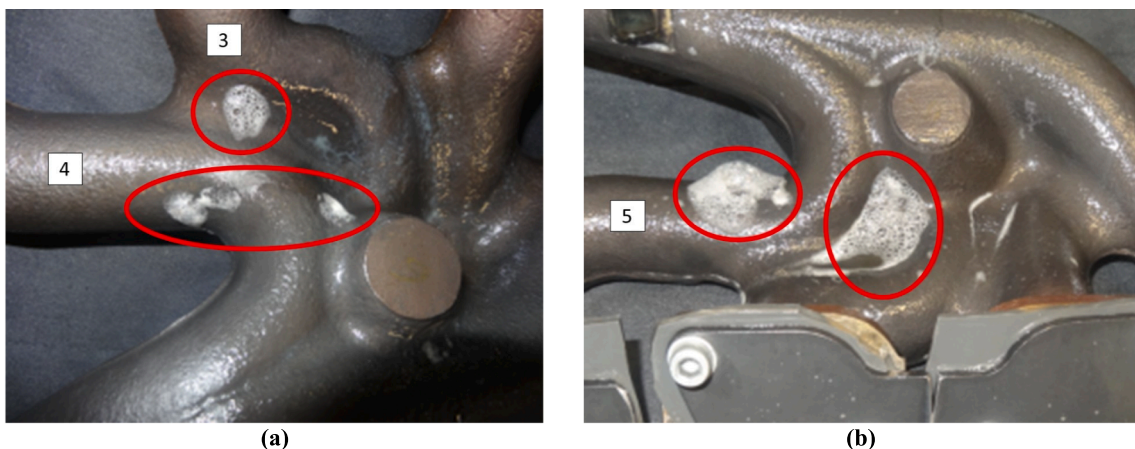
Engine C1 - bubble soap test results, (a) right-hand side exhaust manifold, (b) left-hand side exhaust manifold.
